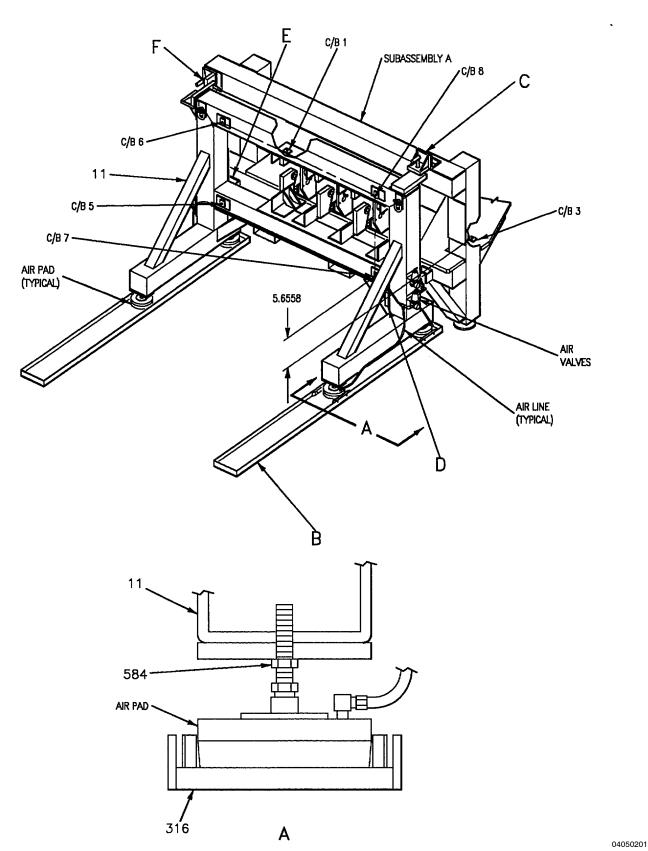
Assembly of Frame and Subassembly A (Sheet 1)
